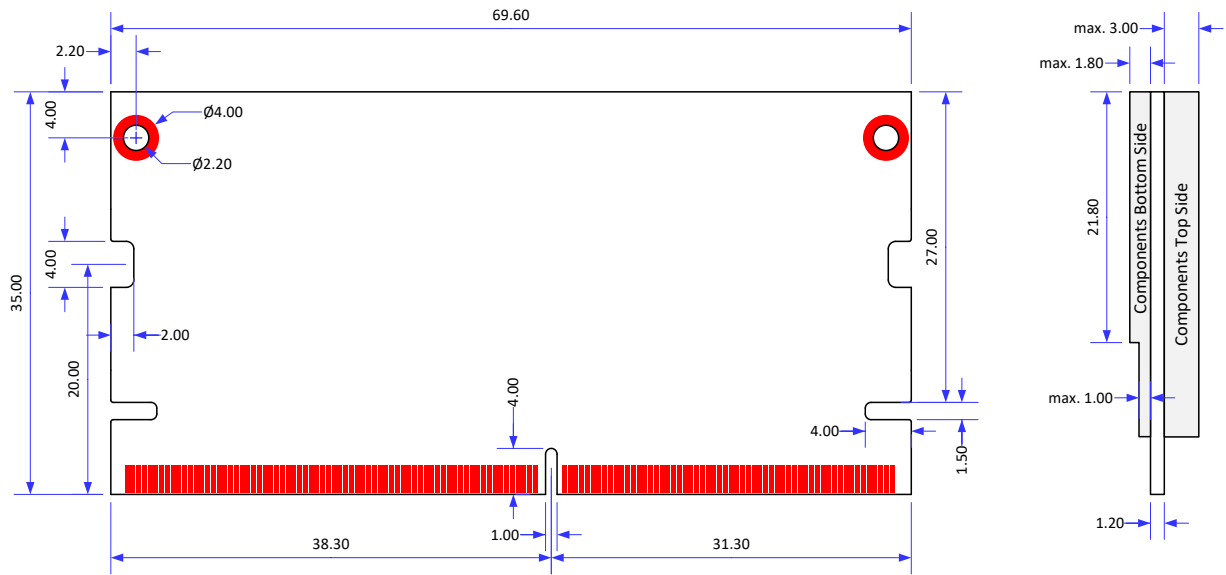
Mechanical dimensions of the Verdin module (top view)
